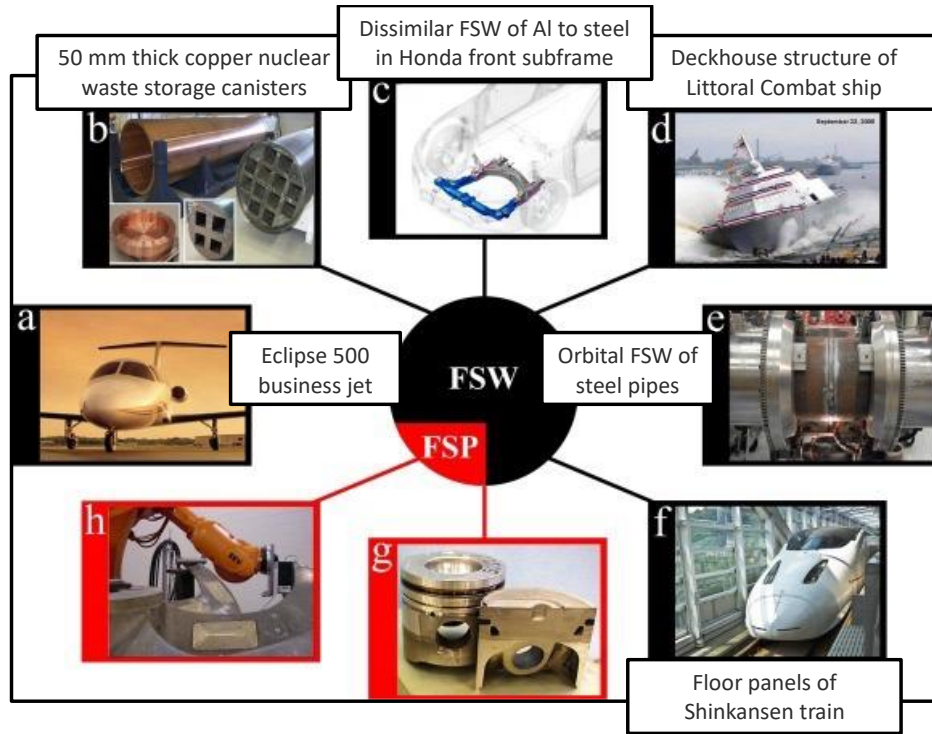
Examples of the industrial application of friction stir welding and processing.
